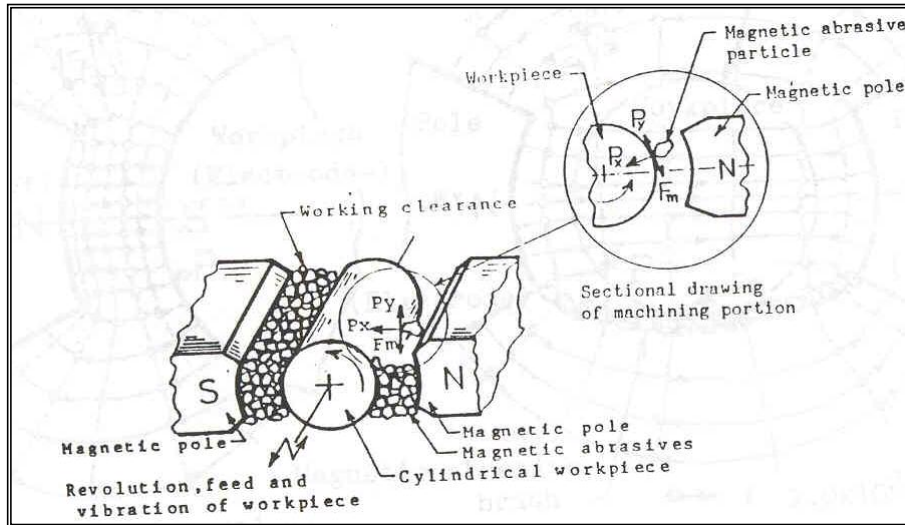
Arrangement for finishing ferromagnetic cylindrical workpiece with axial vibration [after Shimura and Aizawa, 1989]
